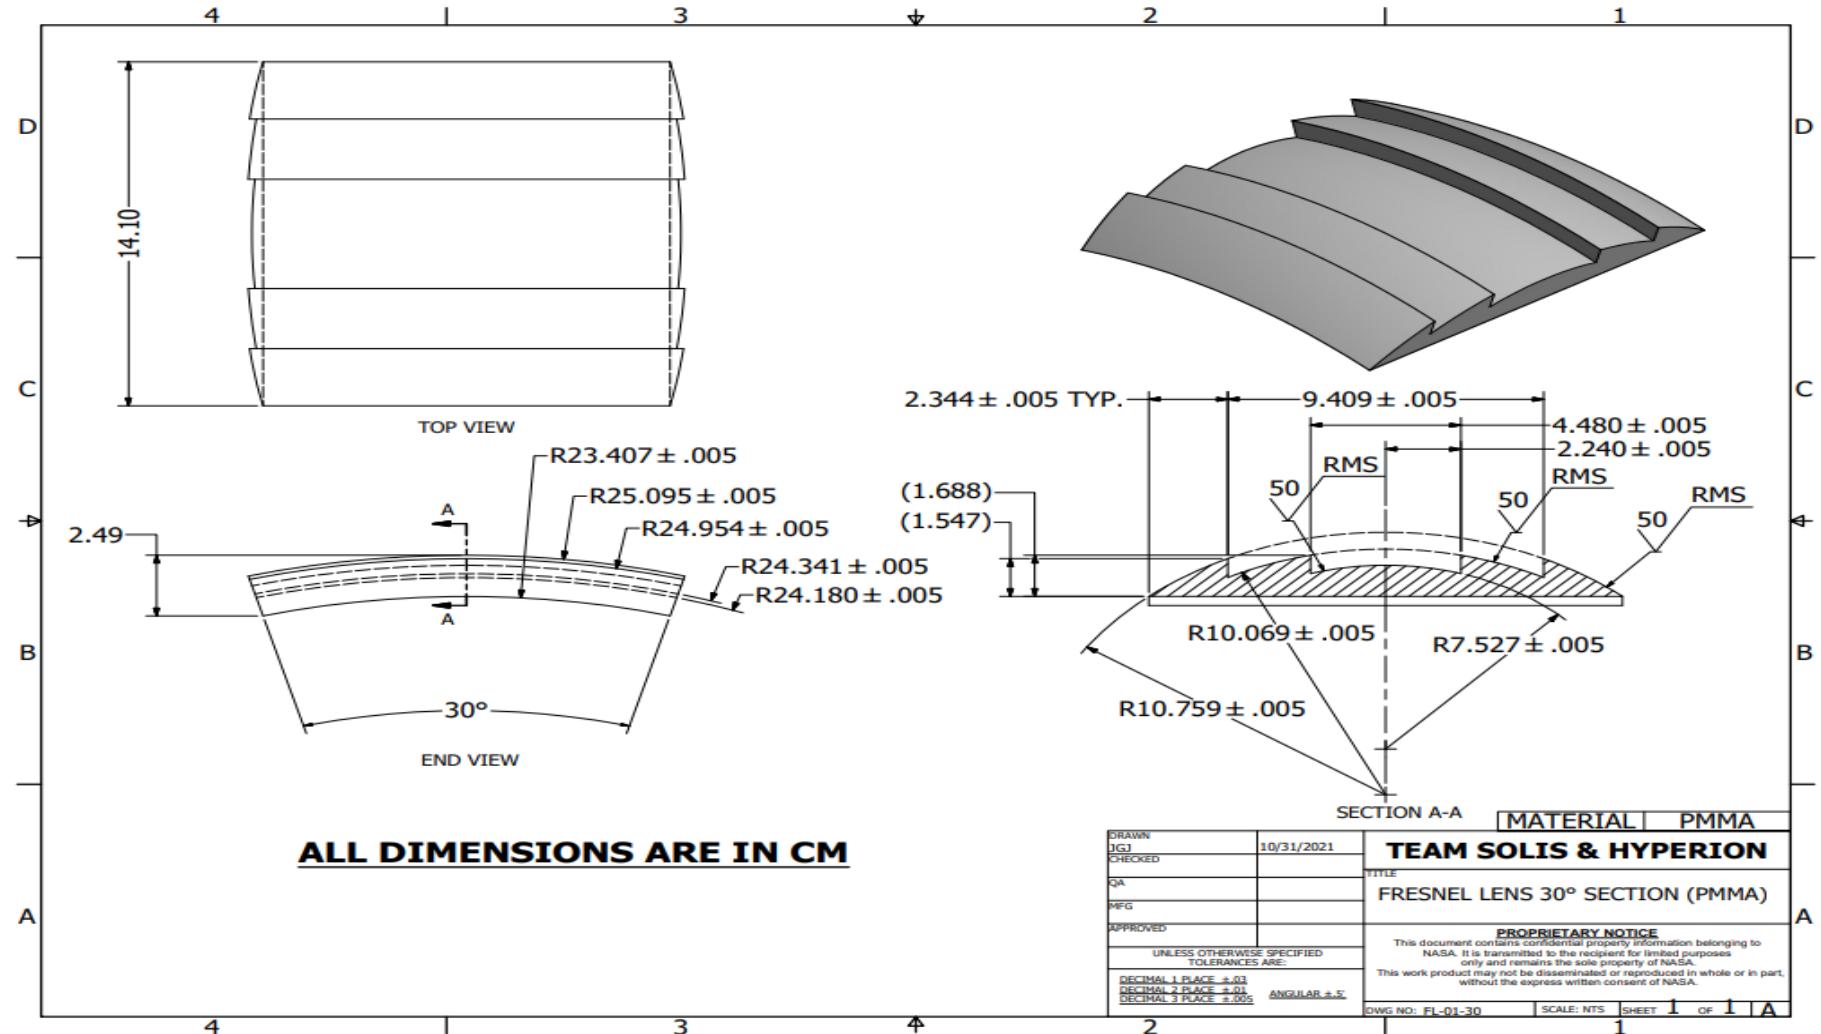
Manufacturing Drawing of PMMA Fresnel Lens 30° Revolve Piece.
